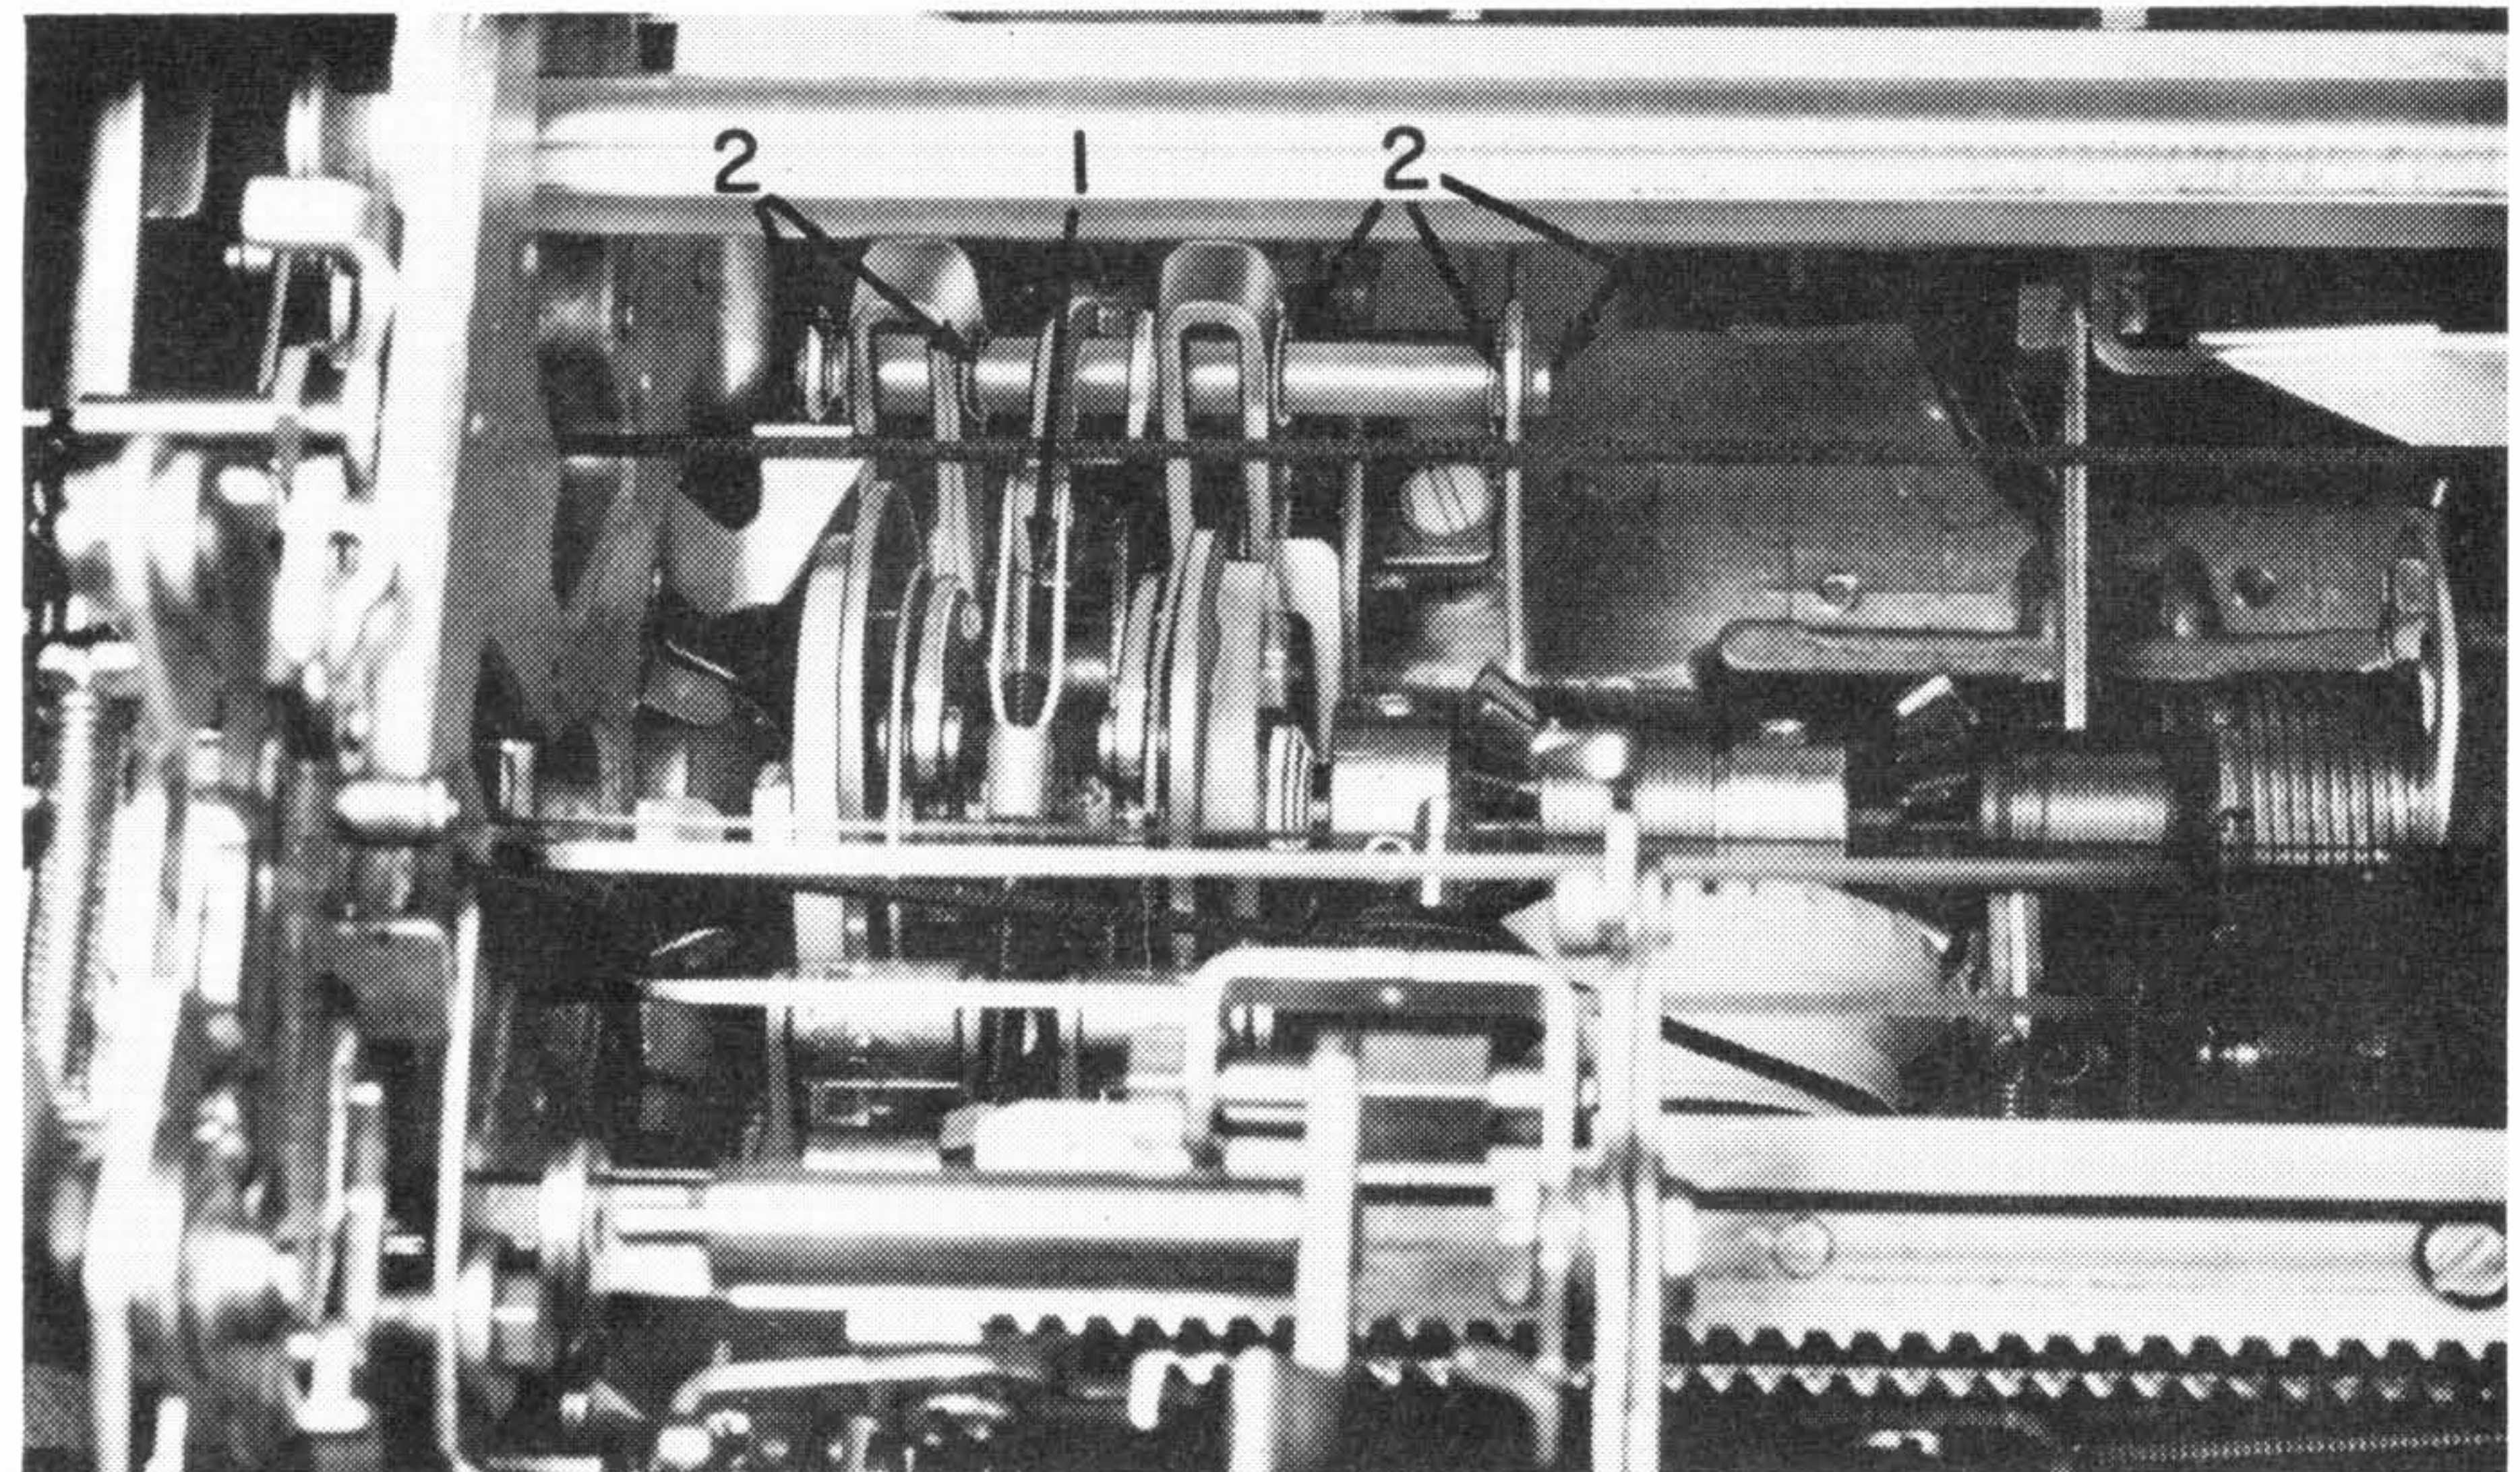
Operational Cam Check Pawl and Escapement Cam Follower Removal
